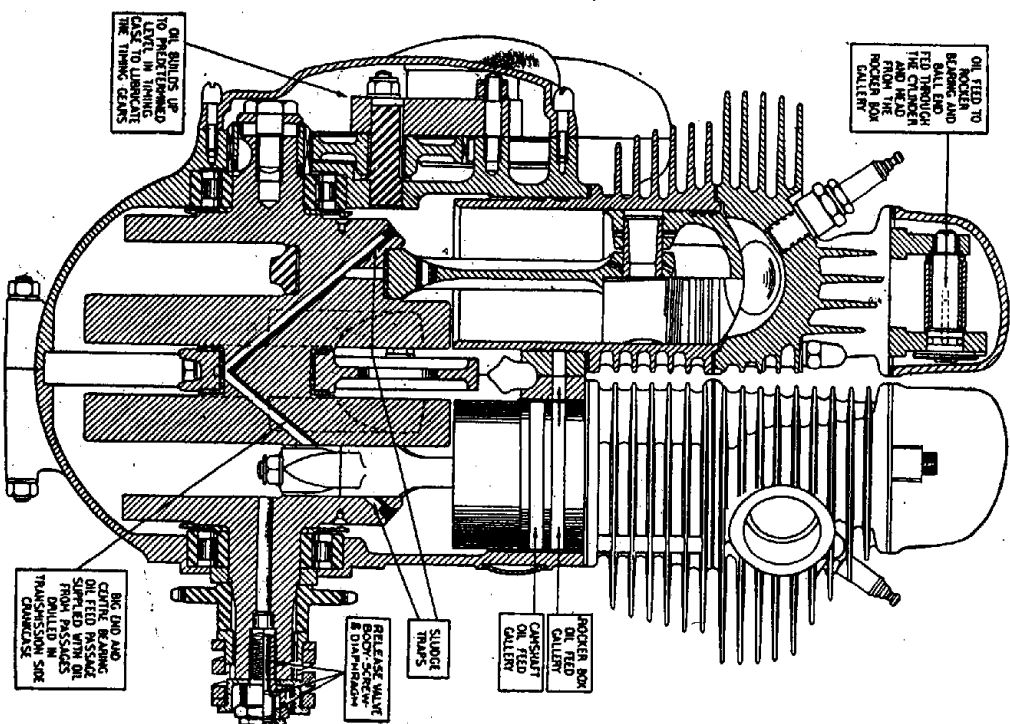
CROSS-SECTION OF ENGINE SHOWING OIL GALLERIES, OIL PASSAGES AND RELEASE VALVE.
